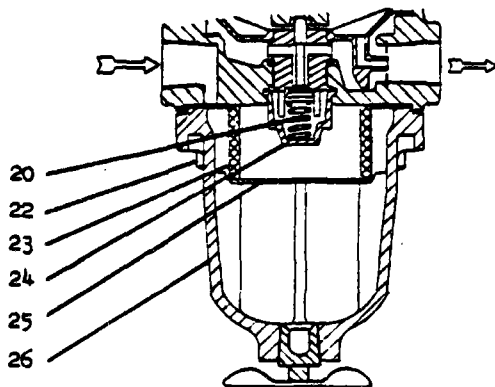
PARTIAL ASSEMBLY OF AF-2 TYPE SHOWING ADDITIONAL PARTS IN FILTER ASSEMBLY.
